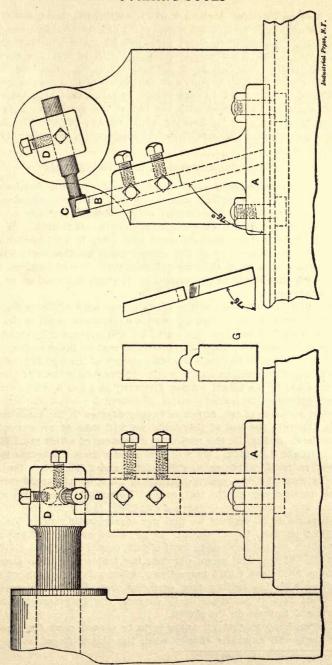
Making a Concave Forming Tool in the Milling Machine
